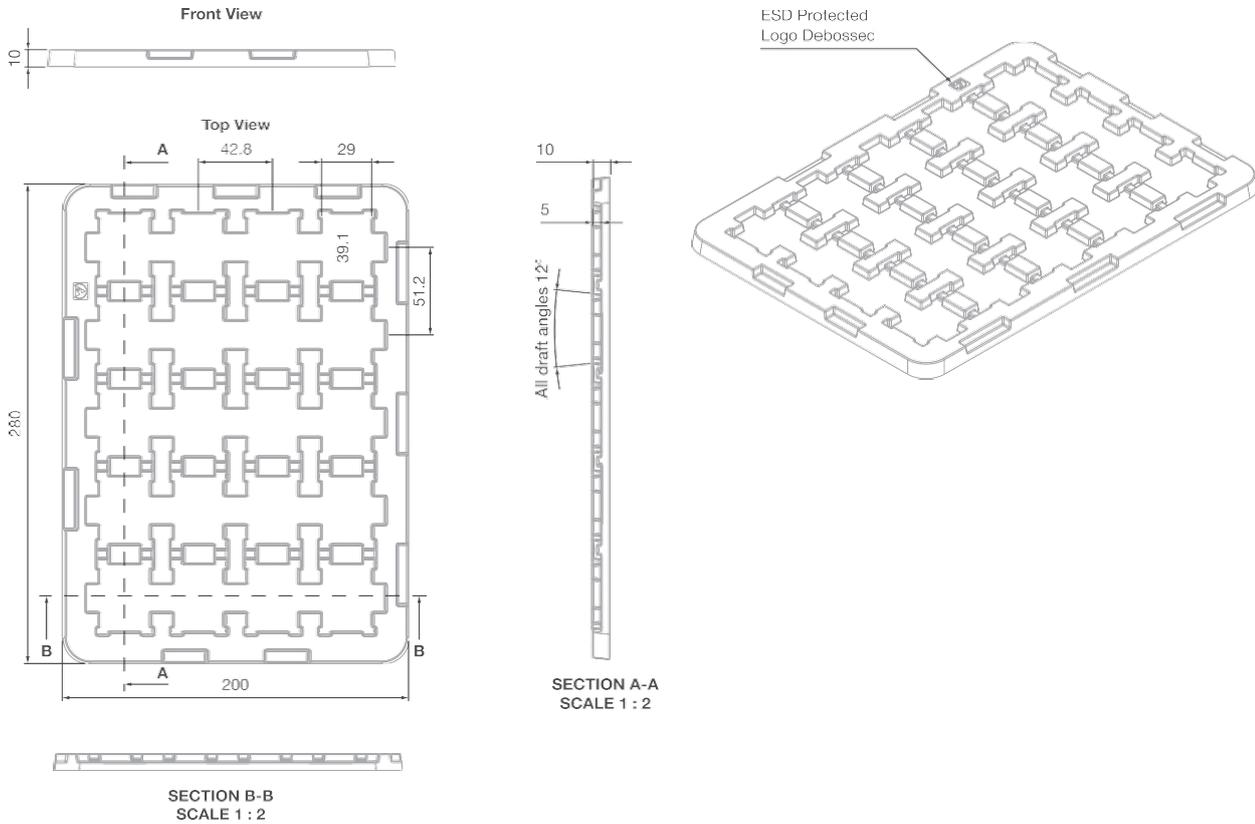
STANDARD PACKAGING BOX DIMENSIONS
